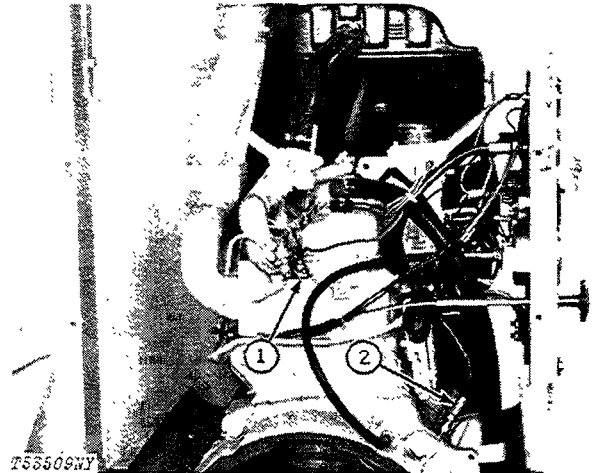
Oil Pressure Hose and Temperature Sending Unit
